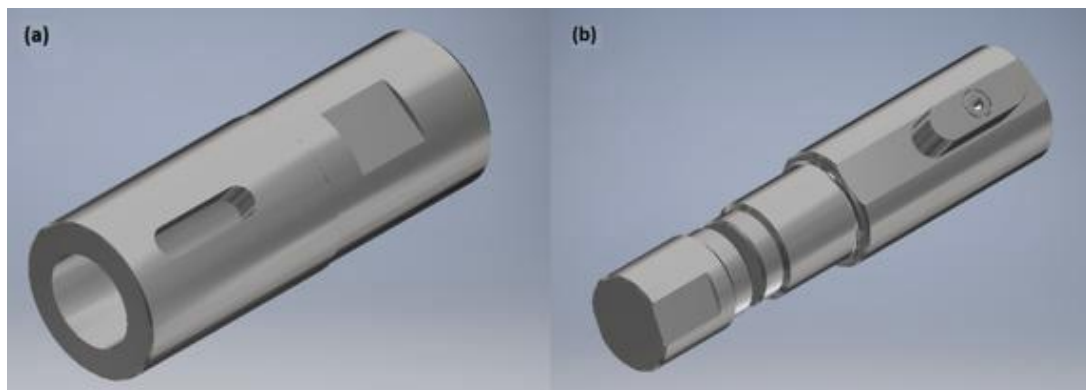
BFSW tool components: (a) Tool holder (b) Tool.
